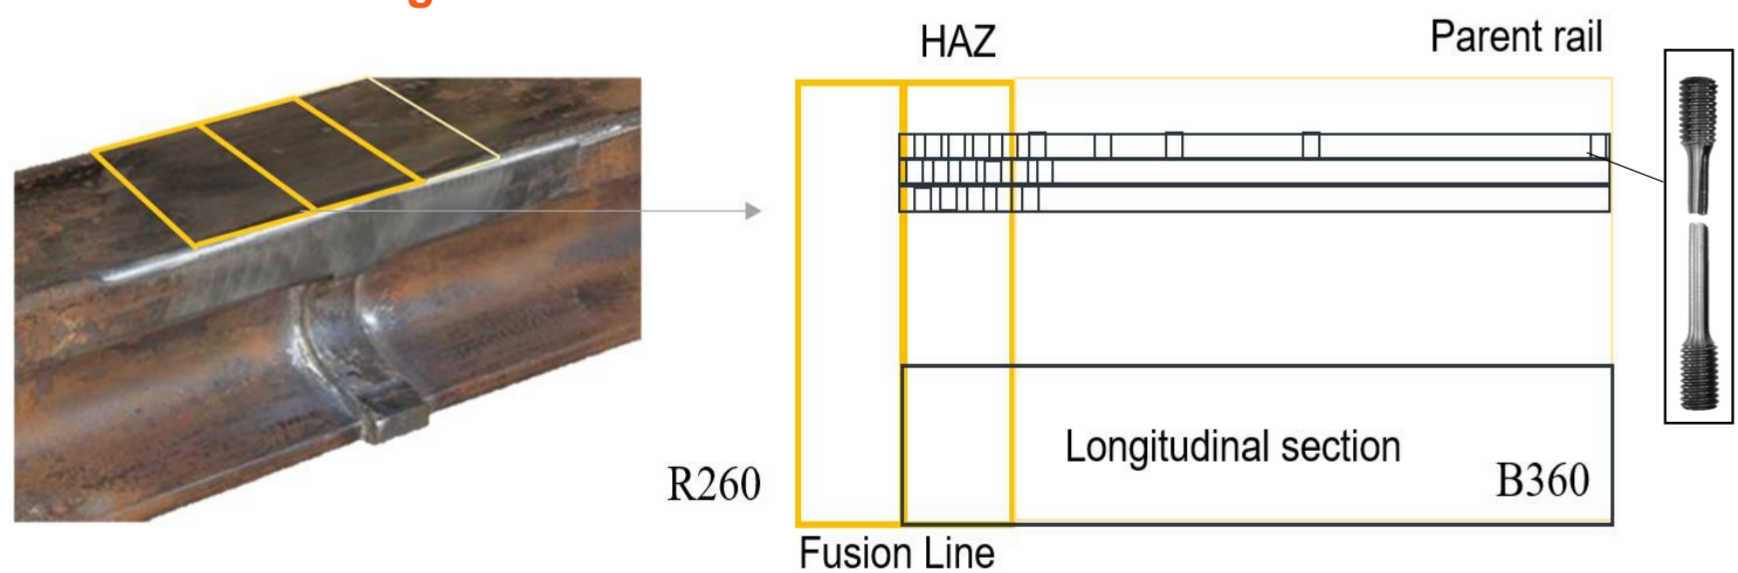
Schematic representation of the samples machined from the HAZ of a R260-B360 weld
